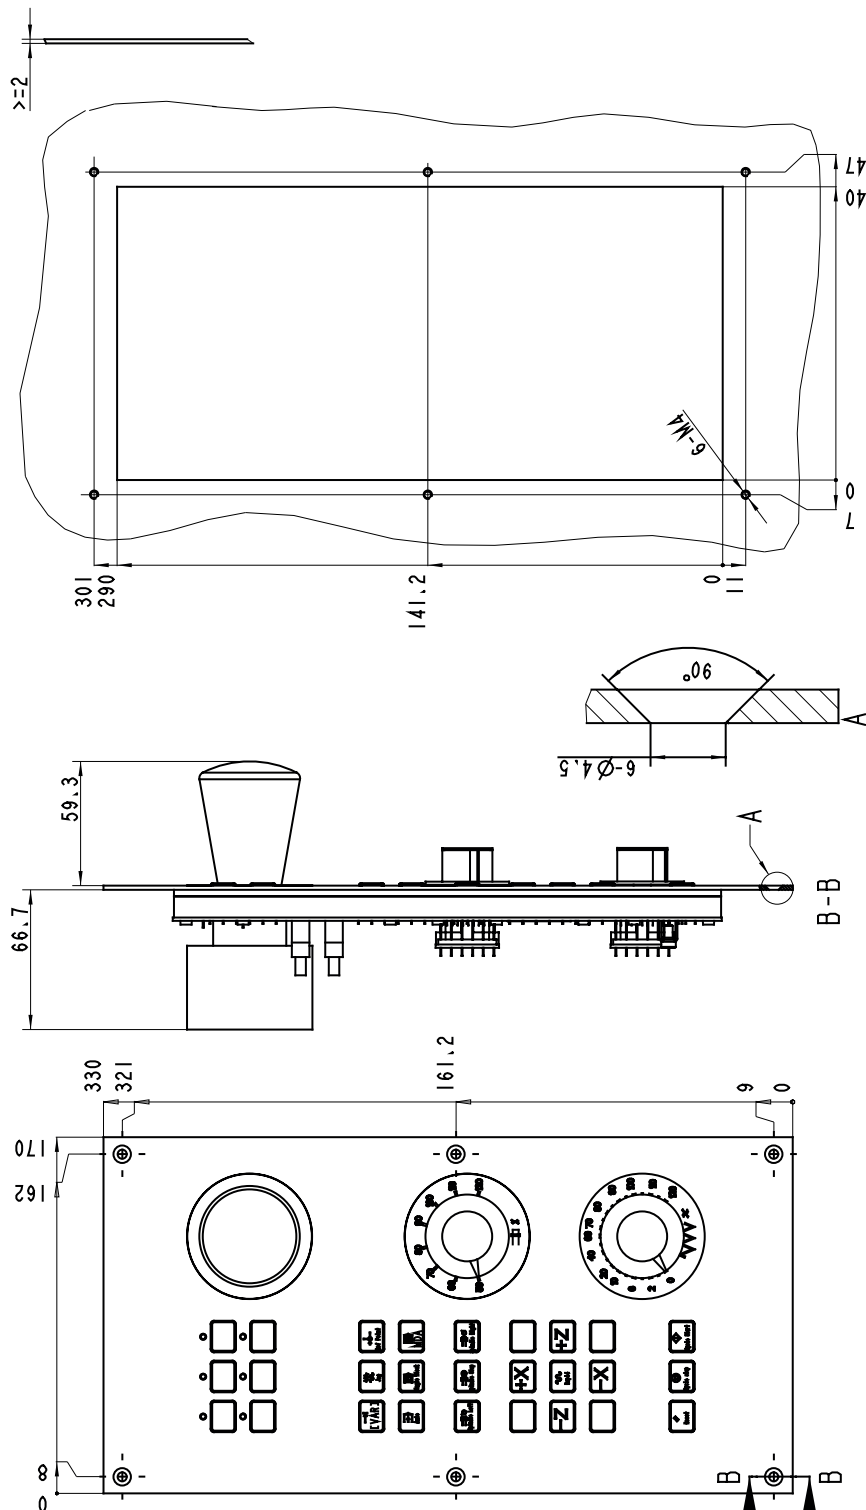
Dimension and hole drilling template of the machine control panel MCP
